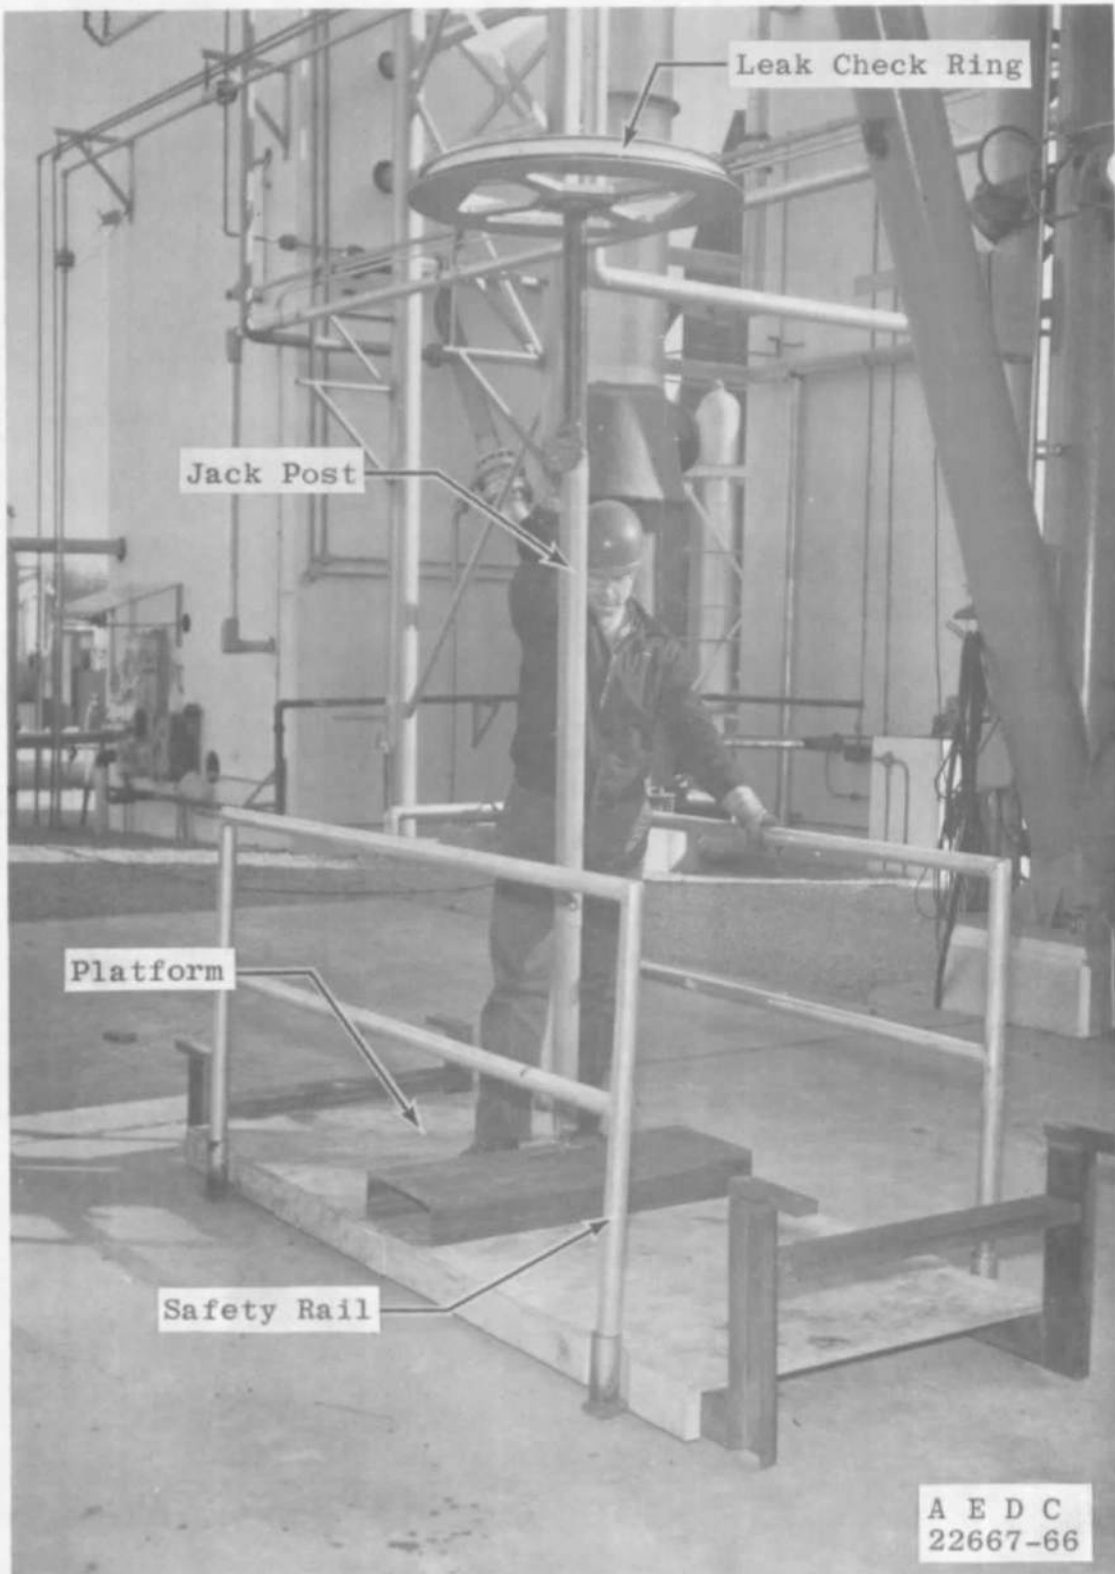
In-Cell Nozzle Extension-Chamber Flange Joint Leak Check Fixture
